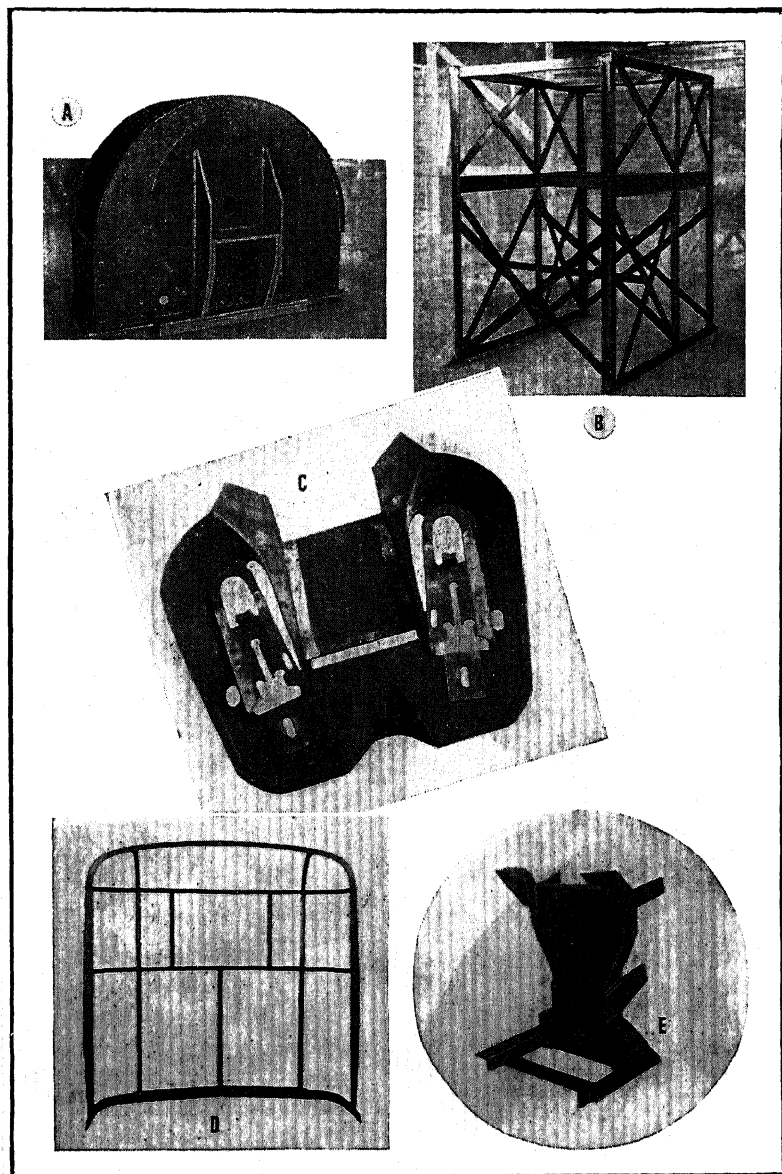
Frames—(A) Pulveriser mill frame. (B) Framework for grain mill. (C) Gathering head for mining machine. (D) House trailer body frame section. (E) Rear post for road grader.
